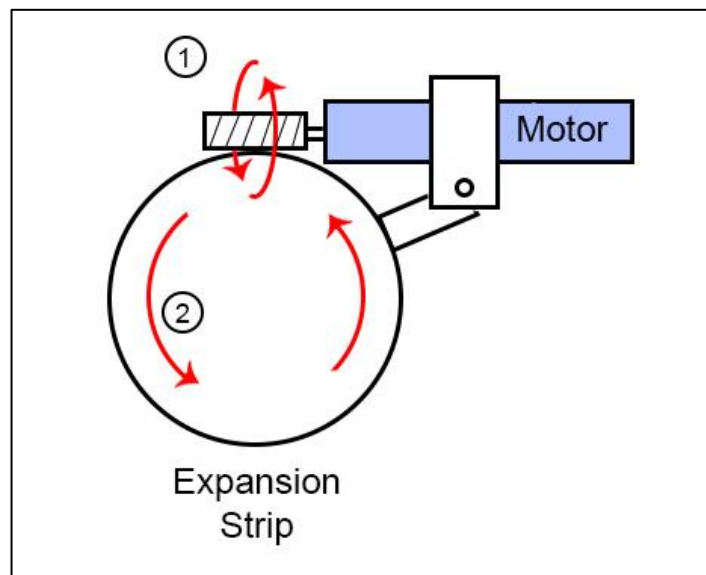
Concept IV (Worm Gear): (1) Motor rotates worm gear mounted on the shaft; (2) Worm gear interacts with grooves on the surface of the strip causing the strip to unwind and expand.
